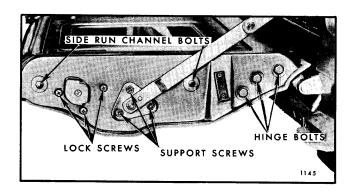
Tail Gate Lock and Support - "B" Body Styles
